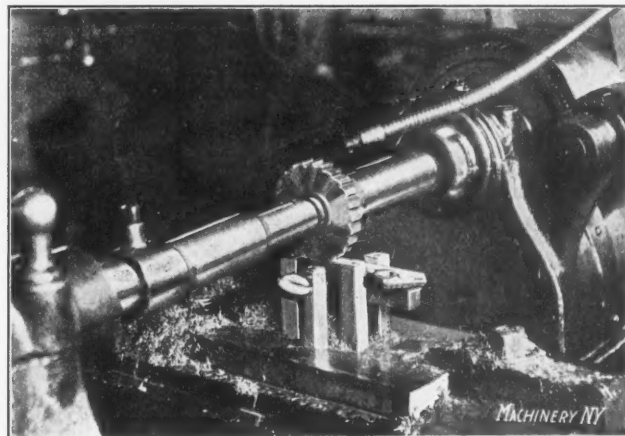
Milling the Slots for the Blades in Cutting-off Tools
